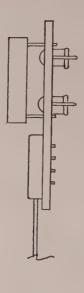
A2, READOUT PC ASSEMBLY #05756801 Rev C
